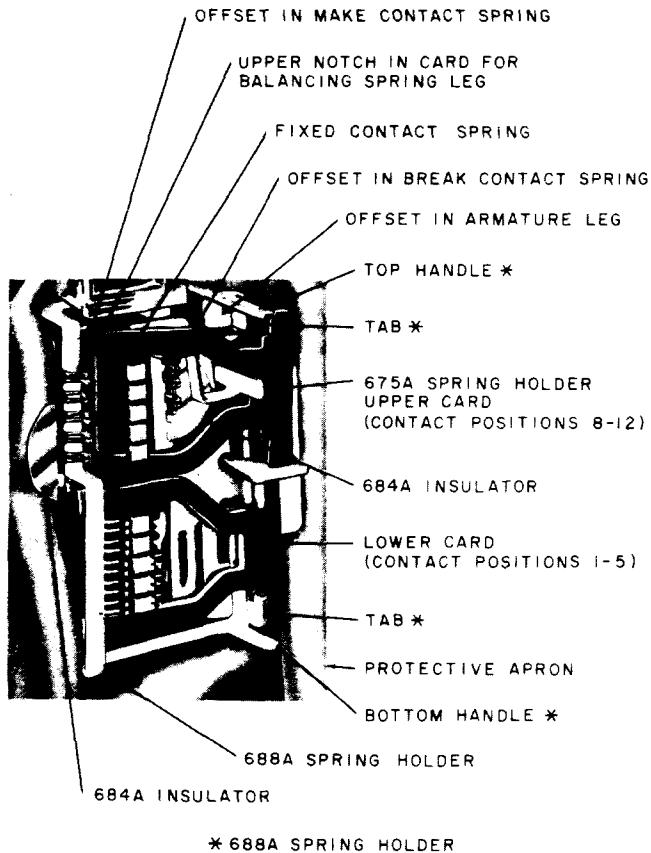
688 Spring Holder Mounted on AK-Type Relay
